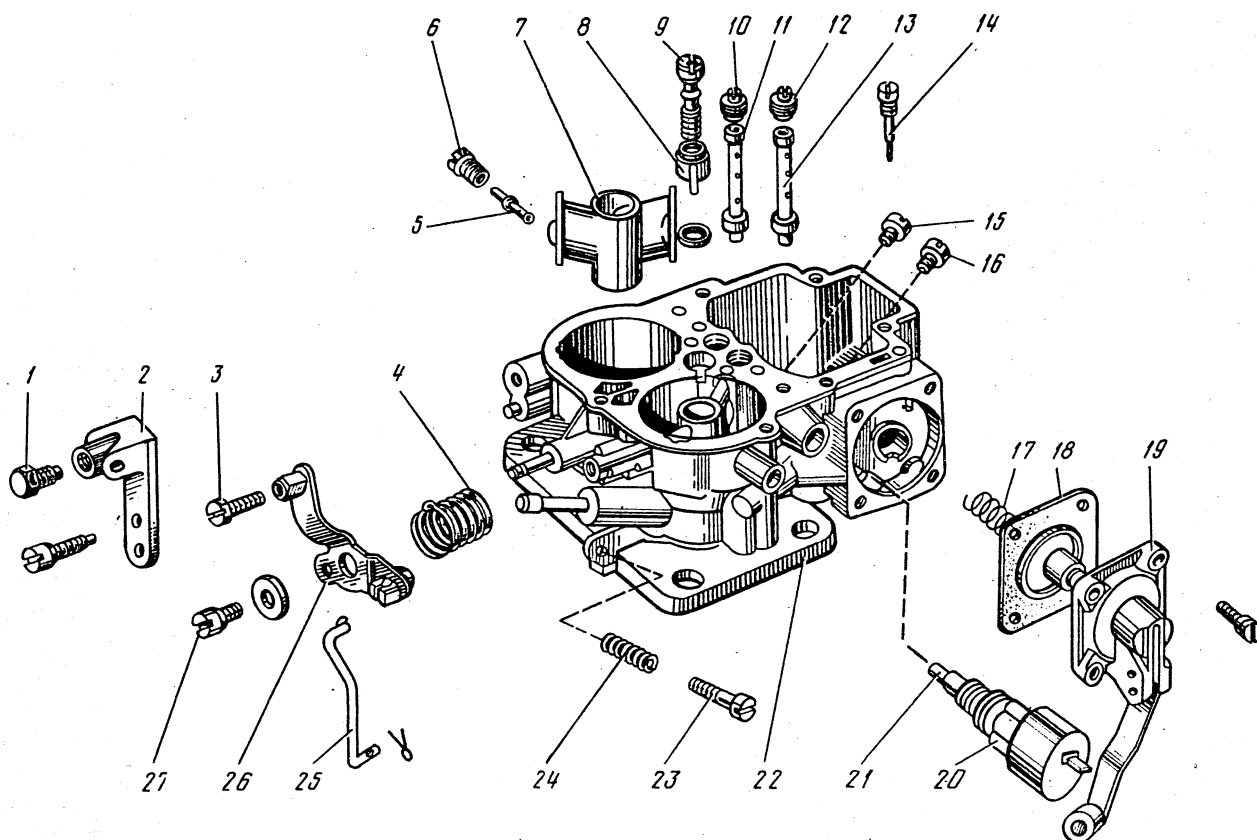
Body Parts of Carburettors 2106-1107010:
